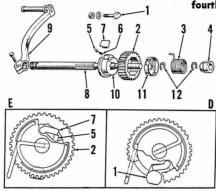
Exploded view of kick-starter rig. N2-10—Exploded view of kick-starter assembly. View "E" shows pawl (7) engaged when starting. When disengaged as shown in view "D", the pawl is retracted by contacting stop (1).
